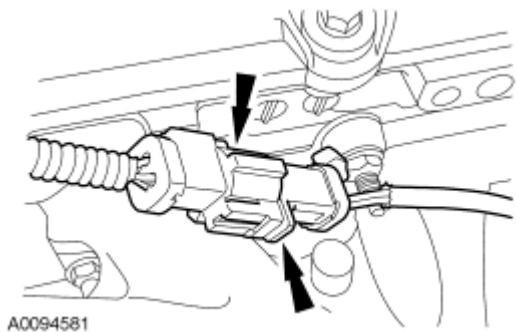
Locating Heated Oxygen Sensor (HO2S) Electrical Connector & Wiring Retainer
